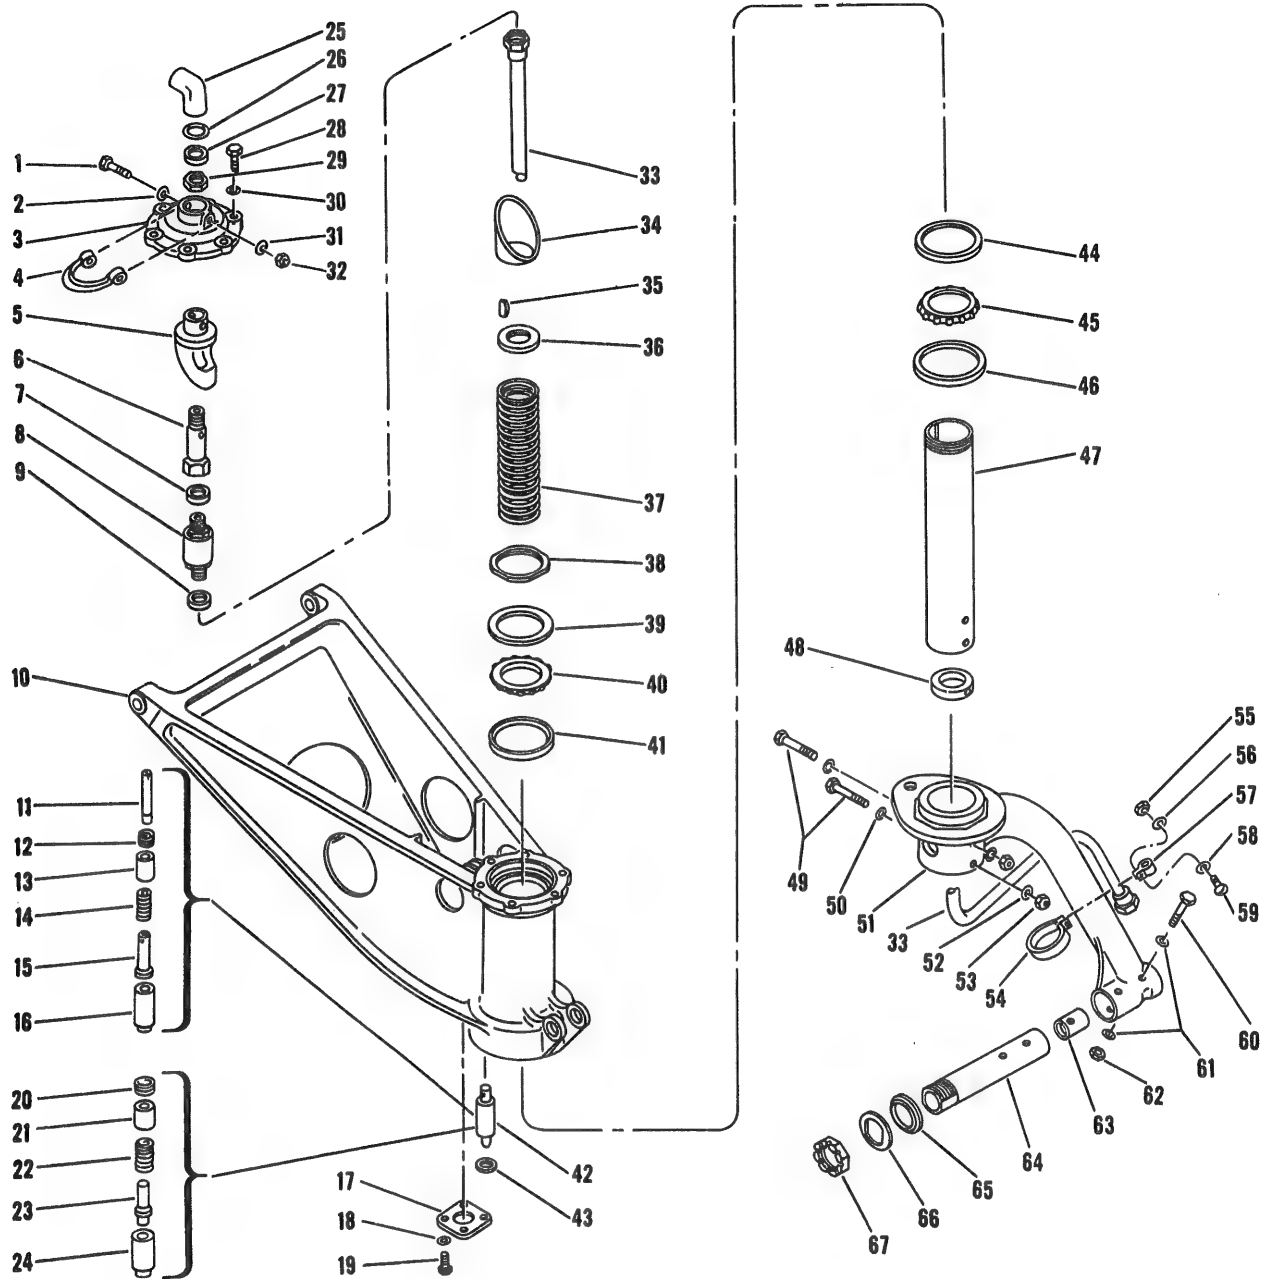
Yoke and Fork Assembly (Sheet 2 of 2)
